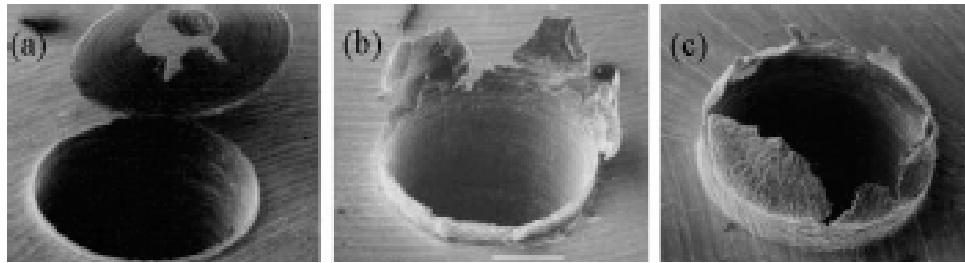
Burr types. a) Burr type II (uniform); b) Burr type III (transient); c) Burr type I (crown) (Min et al., 2001).
